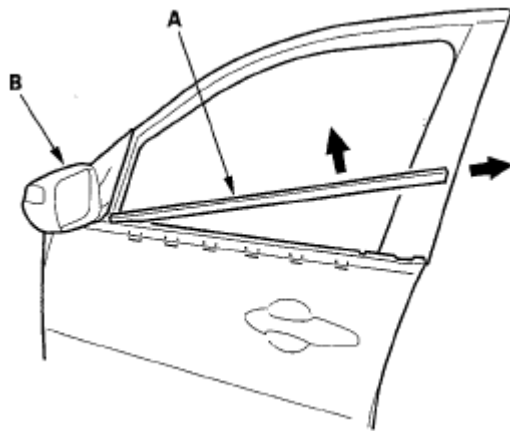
Identifying Glass Outer Weatherstrip And Power Mirror
